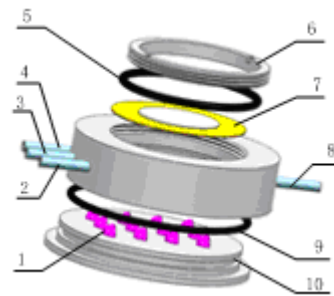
Valveless pump structure; 1. HSG; 2. Tube A; 3. Tube B; 4. Tube C; 5. upper seal ring; 6. screw pump cover; 7. PV; 8. Tube D; 9. lower seal ring; 10. pump seat
